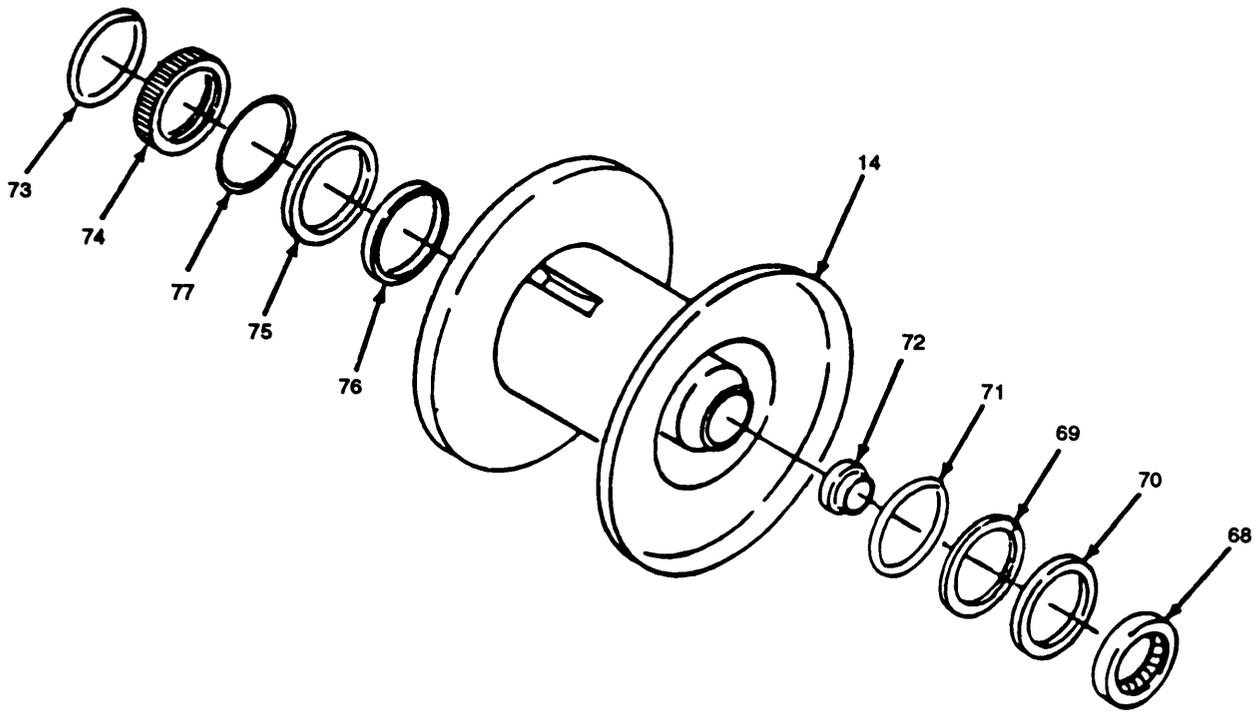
Winch Assembly Model 11-S-EC, Reassembly (Sheet 1 of 10).
